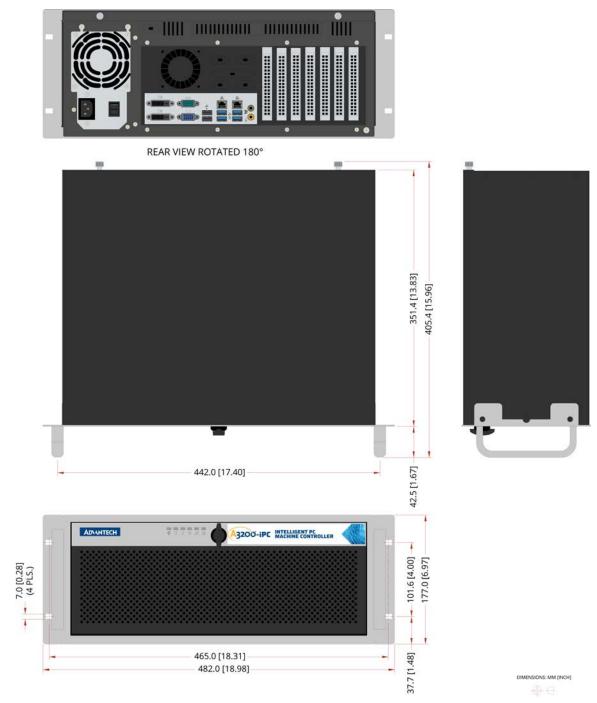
4U Rack Mount Chassis Dimensions (-R402)
